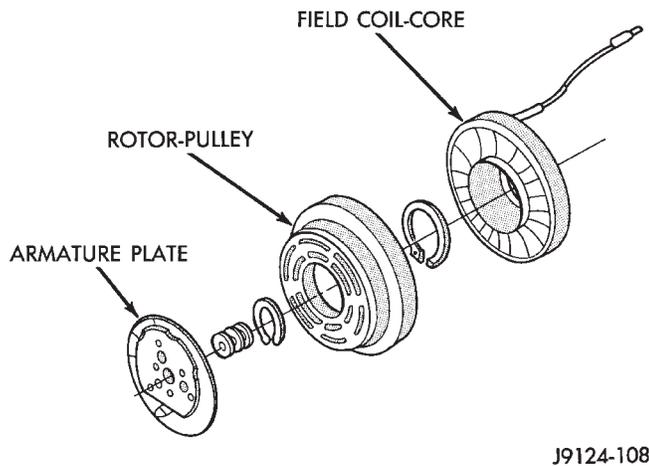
Armature Plate/Rotor-Pulley/Field Coil-Core
